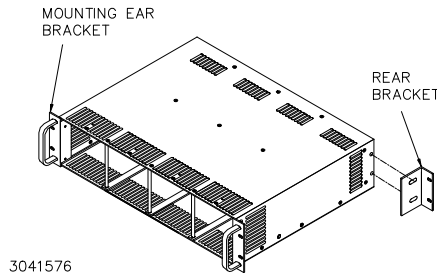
RA 61 RACK ADAPTER ASSEMBLY
